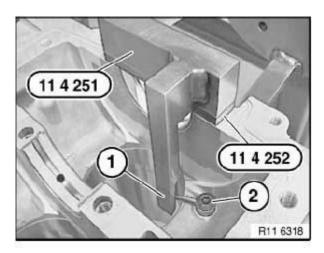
Identifying Special Tool (11 4 251) And (11 4 252) Courtesy of BMW OF NORTH AMERICA, INC.
